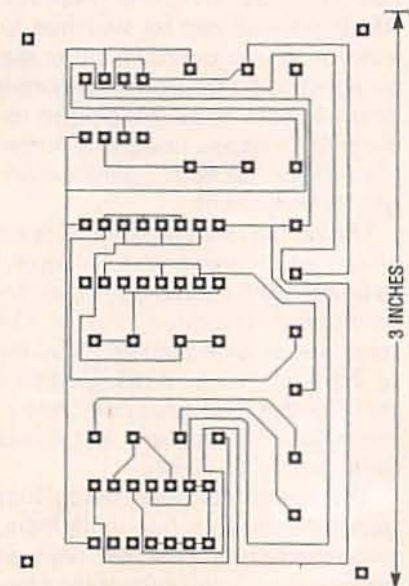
MOST OF THE COMPONENTS mount on a small PC board. The off-board components can be mounted on a terminal strip or perforated construction board.
